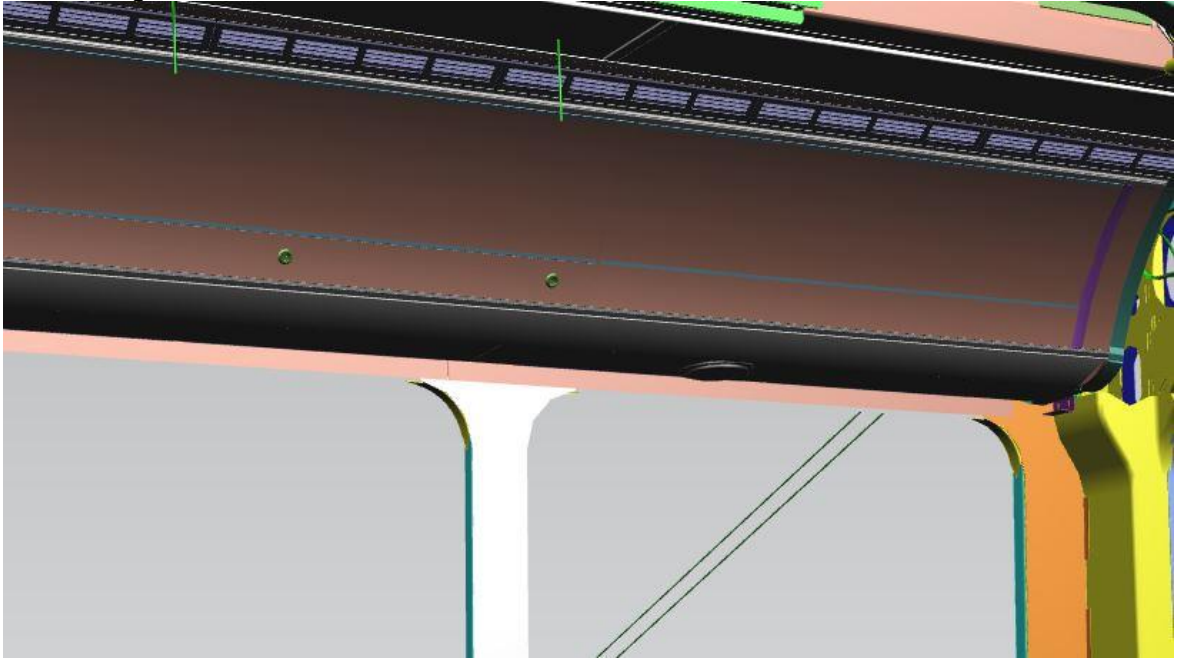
REMOVE LIGHT PANEL & COVERS TO GAIN ACCESS TO FIRE SUPPRESSION BOTTLE
